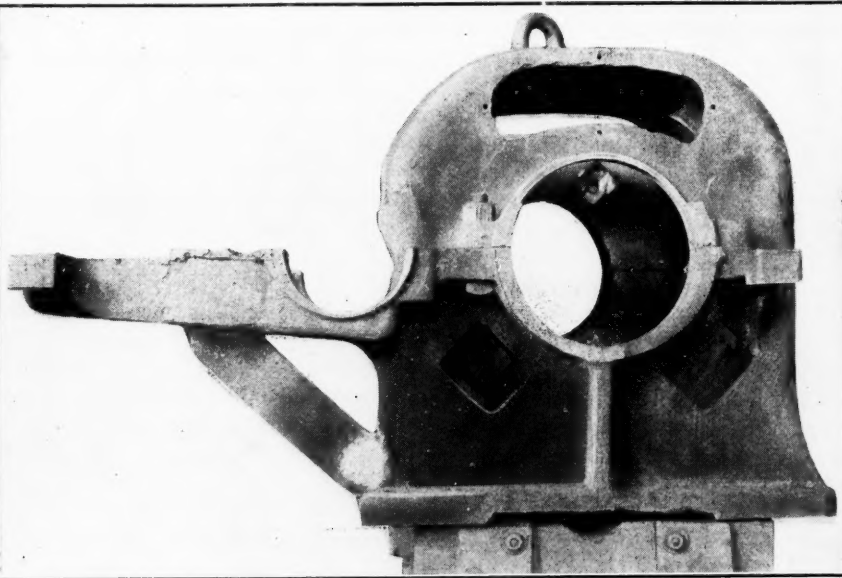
A BRACE WELDED TO THE BEARING BRACKET OF A MOTOR CASING
